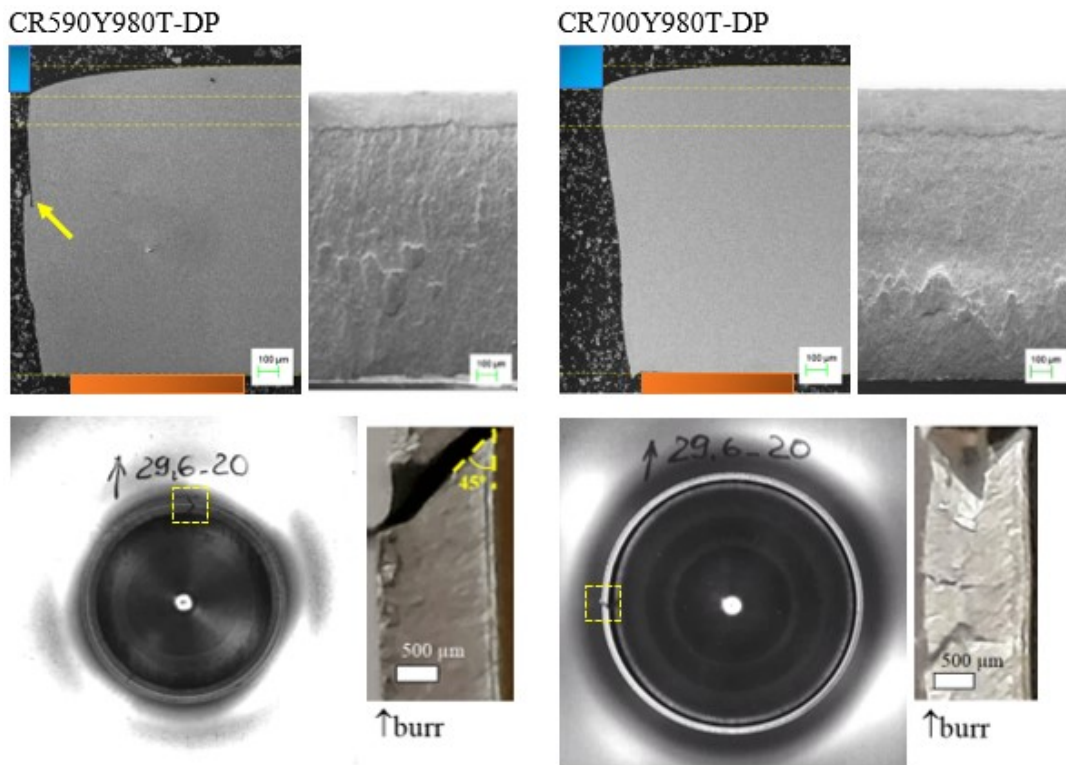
Top: The side and fracture view of cut edges for the studied steels after shear cutting.
